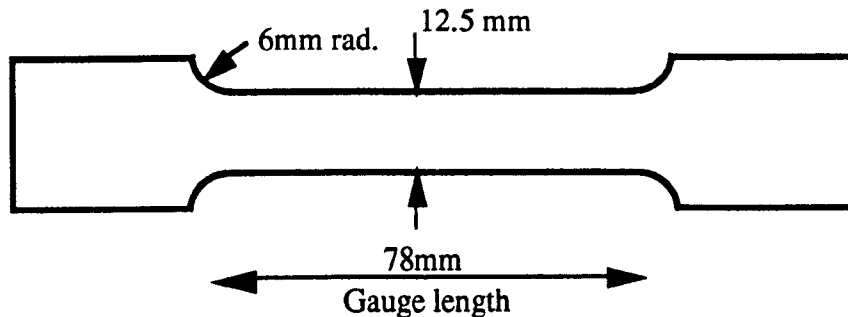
Dimensions of aluminium foil tensile specimens.
